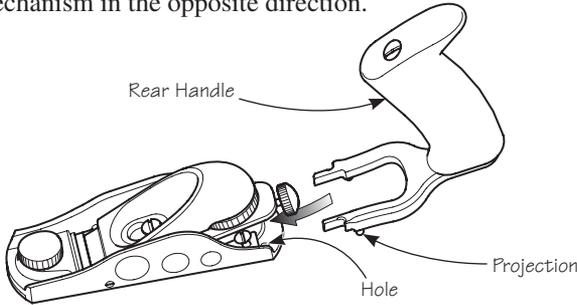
Projections in rear handle arm are inserted into rear holes in block plane body.
